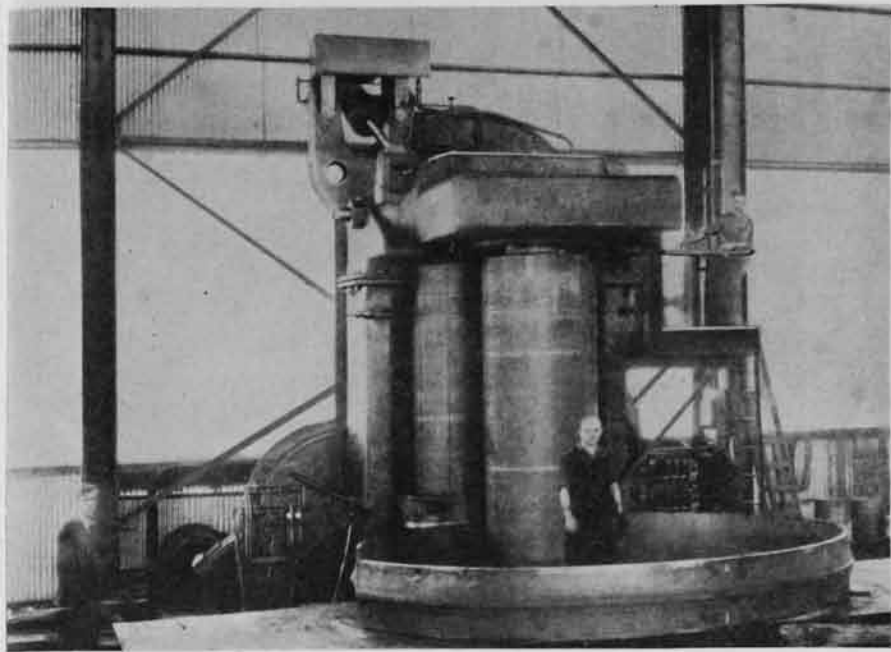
Fabrication of the huge pipes requires this vertical bending roll, the largest ever built. The view shows rolling of stiffener rings for 13-ft. sections, which will be welded between two lengths of pipe. A ringed stem unit is later added to the stiffener ring to form a circular T-beam.
